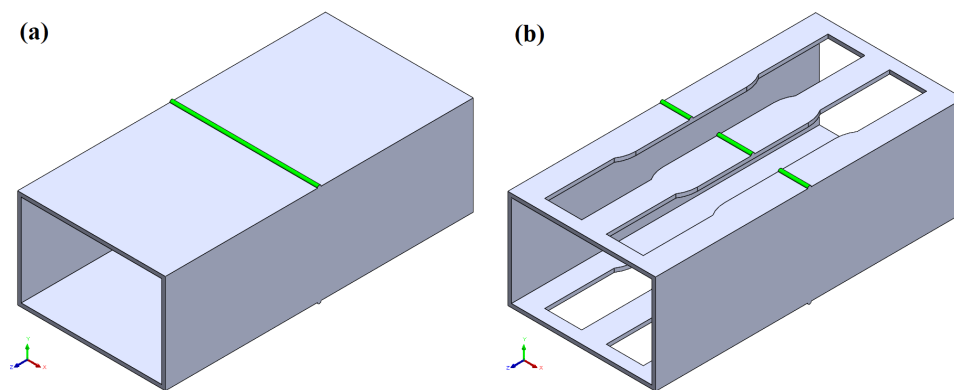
Butt joint specimen manufacturing steps: (a) MIG welding, (b) EDM cutting
